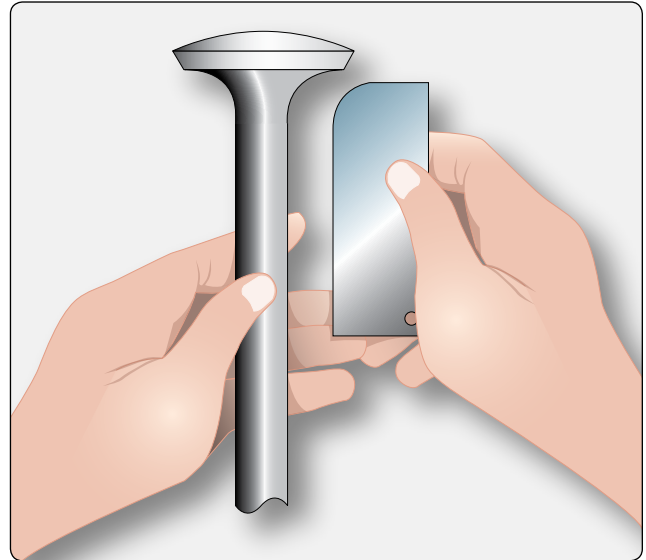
Checking valve stretch with a manufacturer's gauge.
